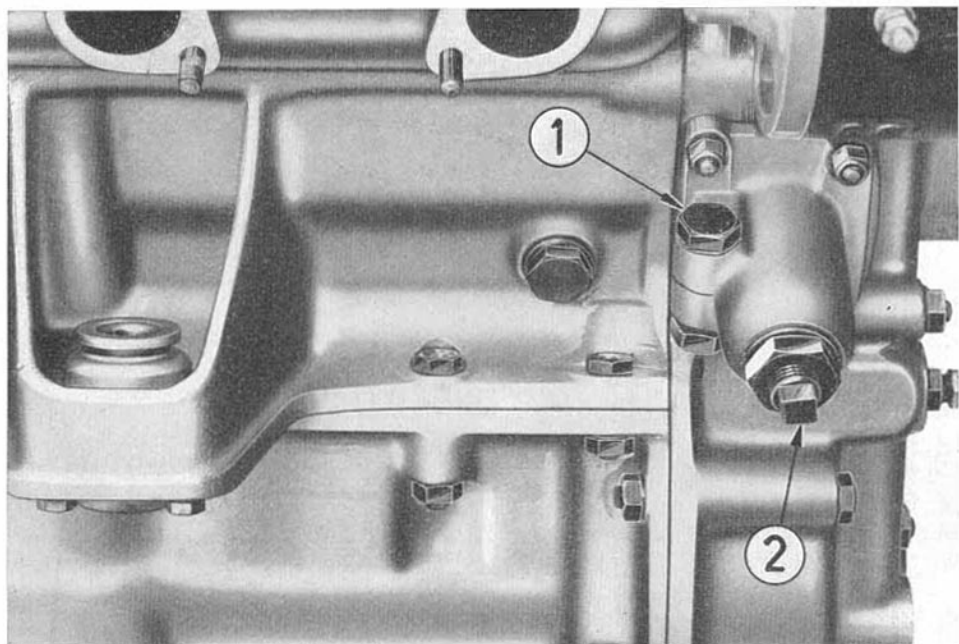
Tensioner casing lock-nut (1) Adjuster pin (2).
